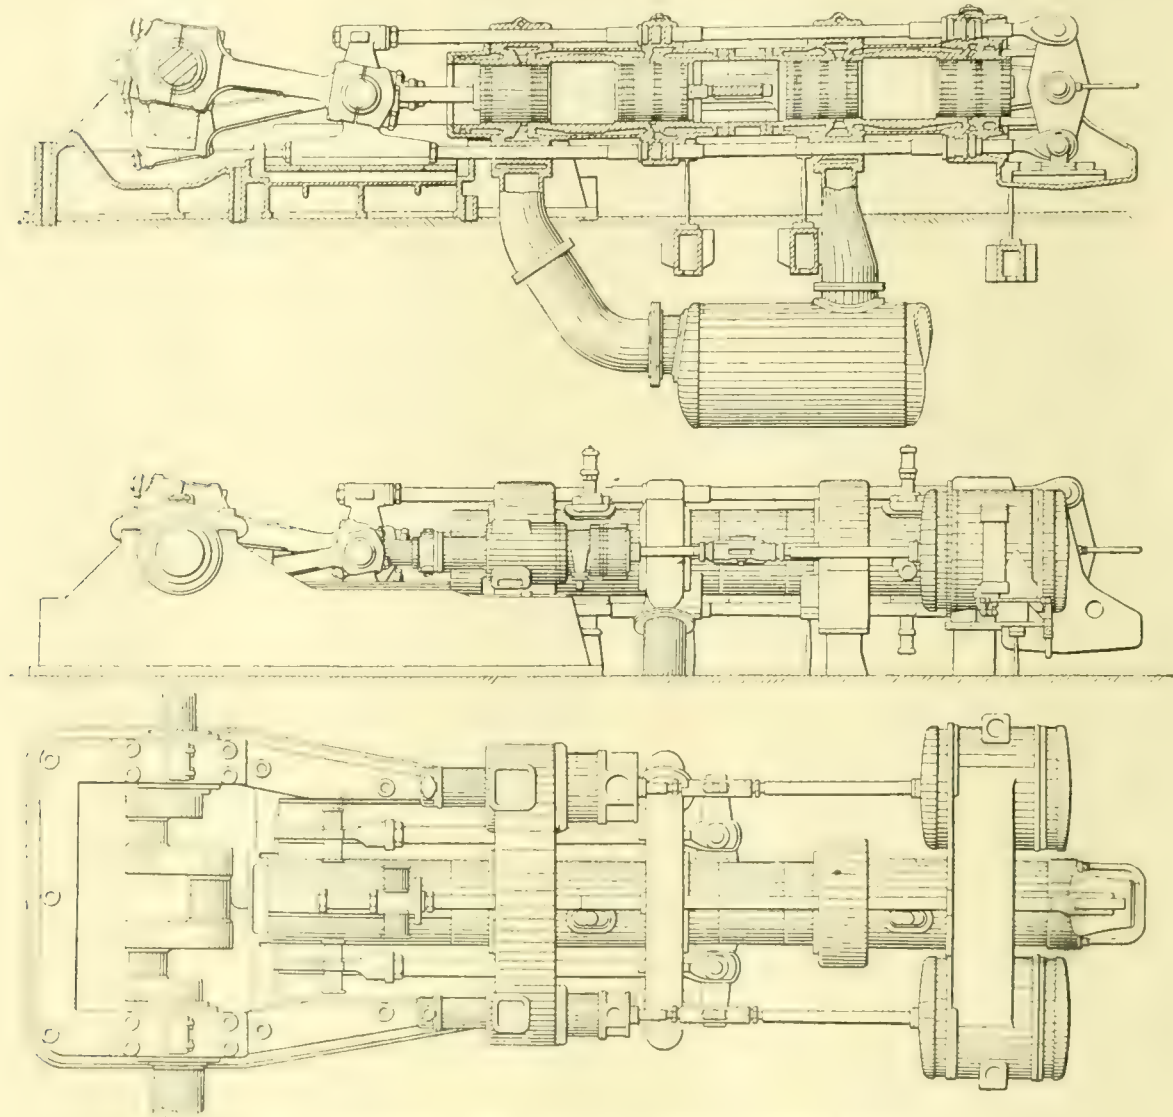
SECTIONAL, SIDE, AND PLAN VIEWS OF JUNKERS ENGINE.
